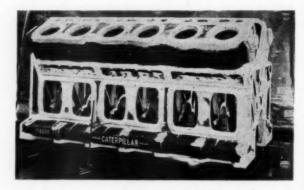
Surface plate with engine cylinder block set up for dimensional checking.
